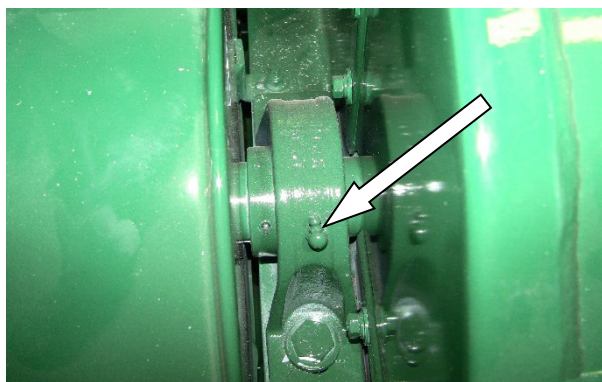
Rear Cylinder Shaft Bearing (See Arrow) (Shields Removed For Clarity).
